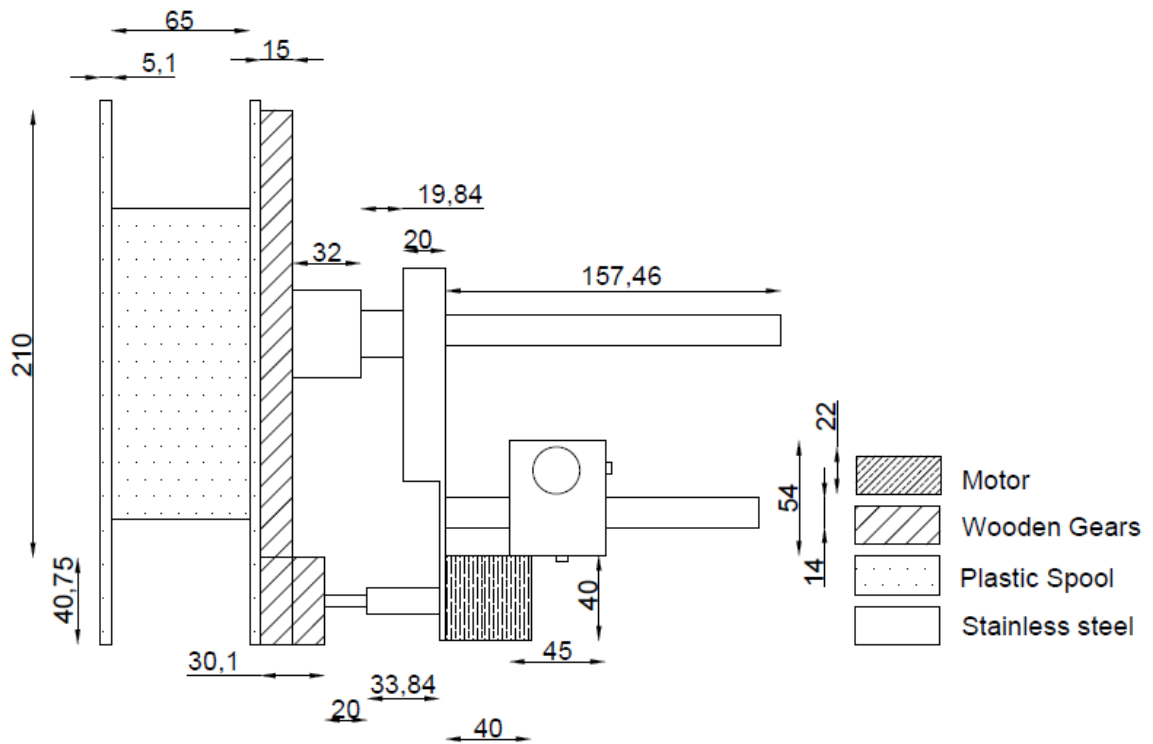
Mechanical drawing of Unit 6 – collection/pulling (Front view; dimensions in mm)
